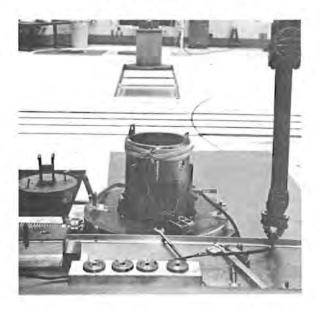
Empty Canister in Weld Pit Ready to Receive Fuel Assembly (Note Heat Tape Near Top of Canister Body)
